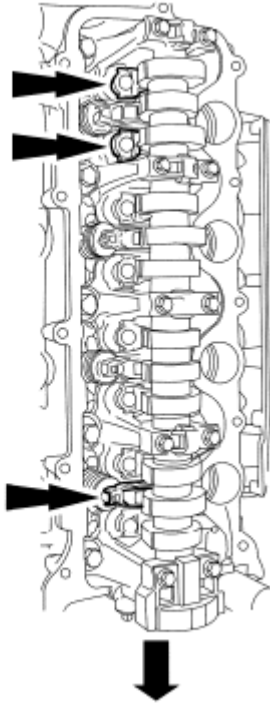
Identifying No. 1 Cylinder Camshaft Exhaust Lobe
